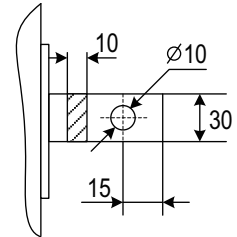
Dimensions of Jianli filters (250-800 A) (unit: mm)
